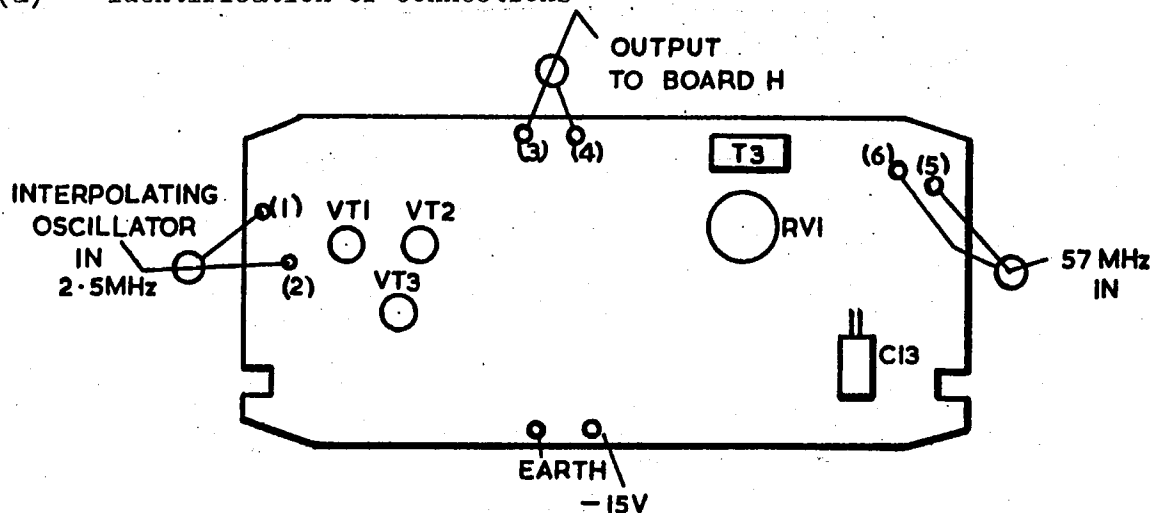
BOARD G, VIEWED FROM COMPONENT SIDE
